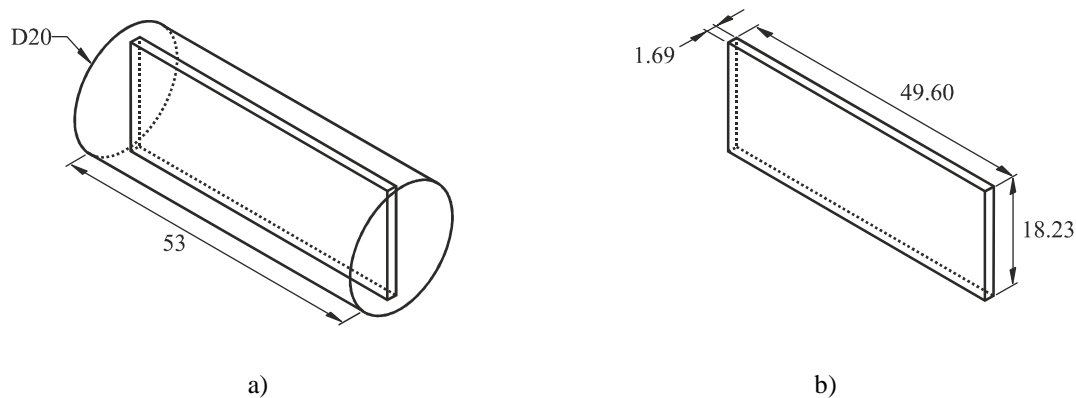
Specimen geometry used in the IET tests: a) initial geometry; b) final geometry.
